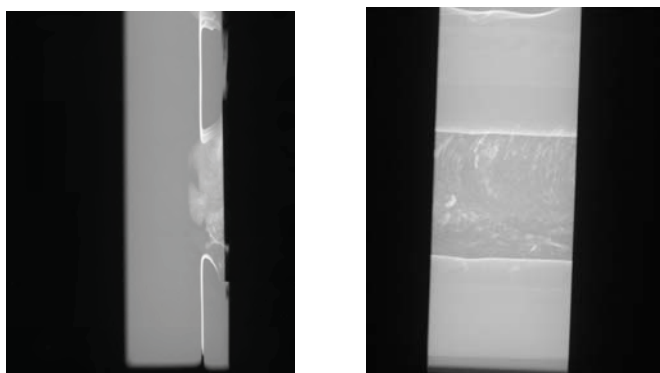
Side and top view projections of the weld sample looking into the lap weld joint. . The brighter/whiter areas contain copper, which has been either placed between the aluminum plates before the weld (Figure 1) or entrained into the weld joint during the FSW process (Figure 4). The pixel intensity shown in these images is proportional to the density and x-ray path length through the object, thereby making the copper regions brighter than the aluminum regions, i.e. this is best shown by the long paths through the copper sheet which result in the brightest portion of the left image.
